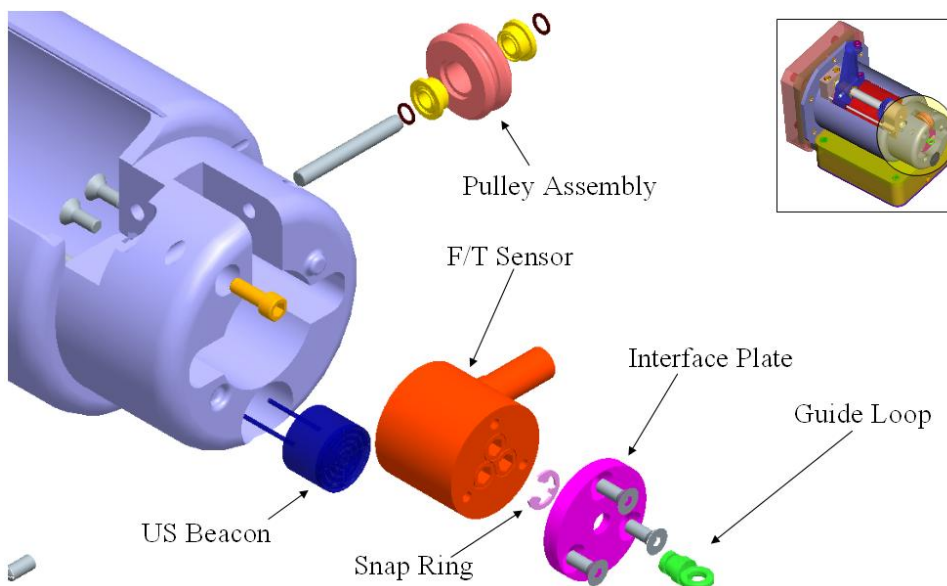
Exploded view of the reel head, courtesy Payload Systems Incorporated.
